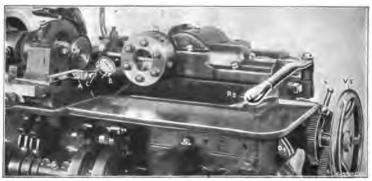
Setting the Rising Block with the Aid of a Brown & Sharpe Dial Test Indicator
